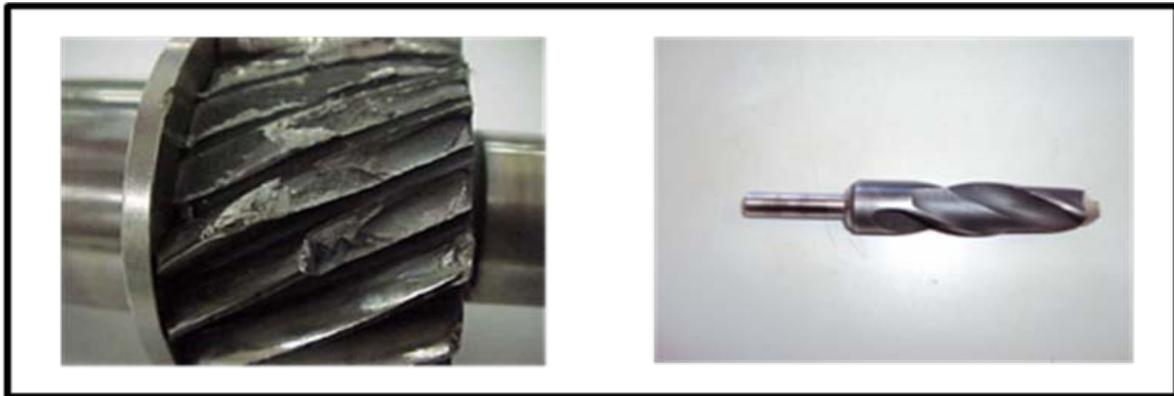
Transmission Gear box and drill with milled rods (Source: Own Authorship)
